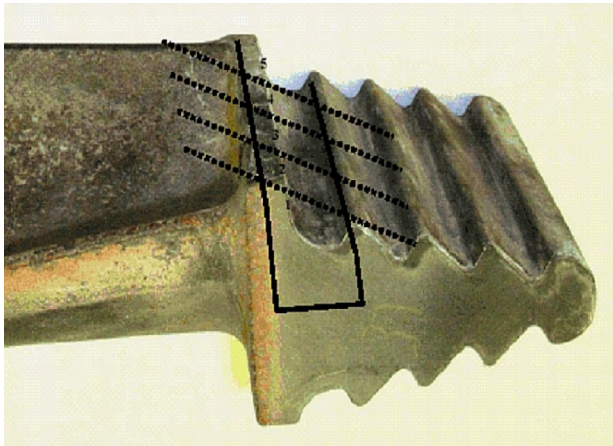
Location of Cross-Sectional Samples Cut to Examine Corrosion Wedge.
